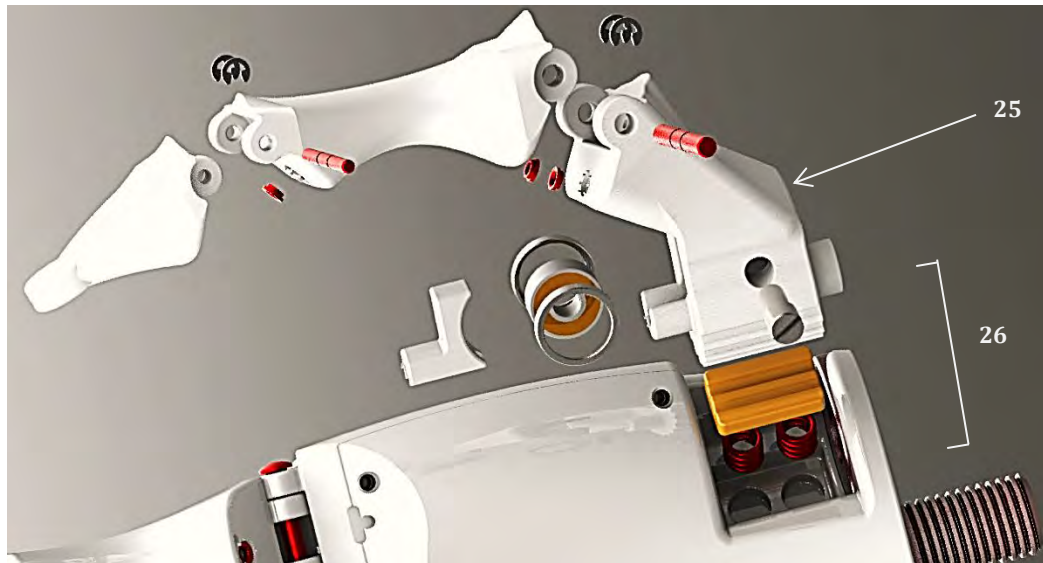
Exploded perspective view of the thumb and its mechanisms
